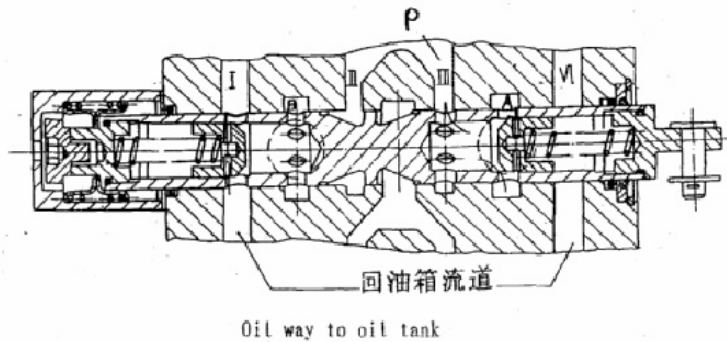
The inclining position forward of slide valve for bucket
